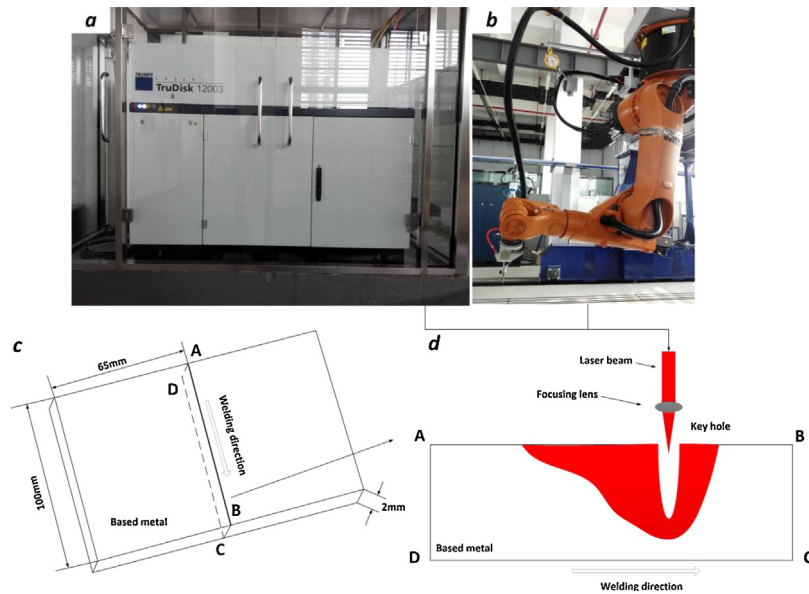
Welding system including a. Laser device, b. Welding robot, c. Welding plates and d. Schematic illustration for the workpiece.
